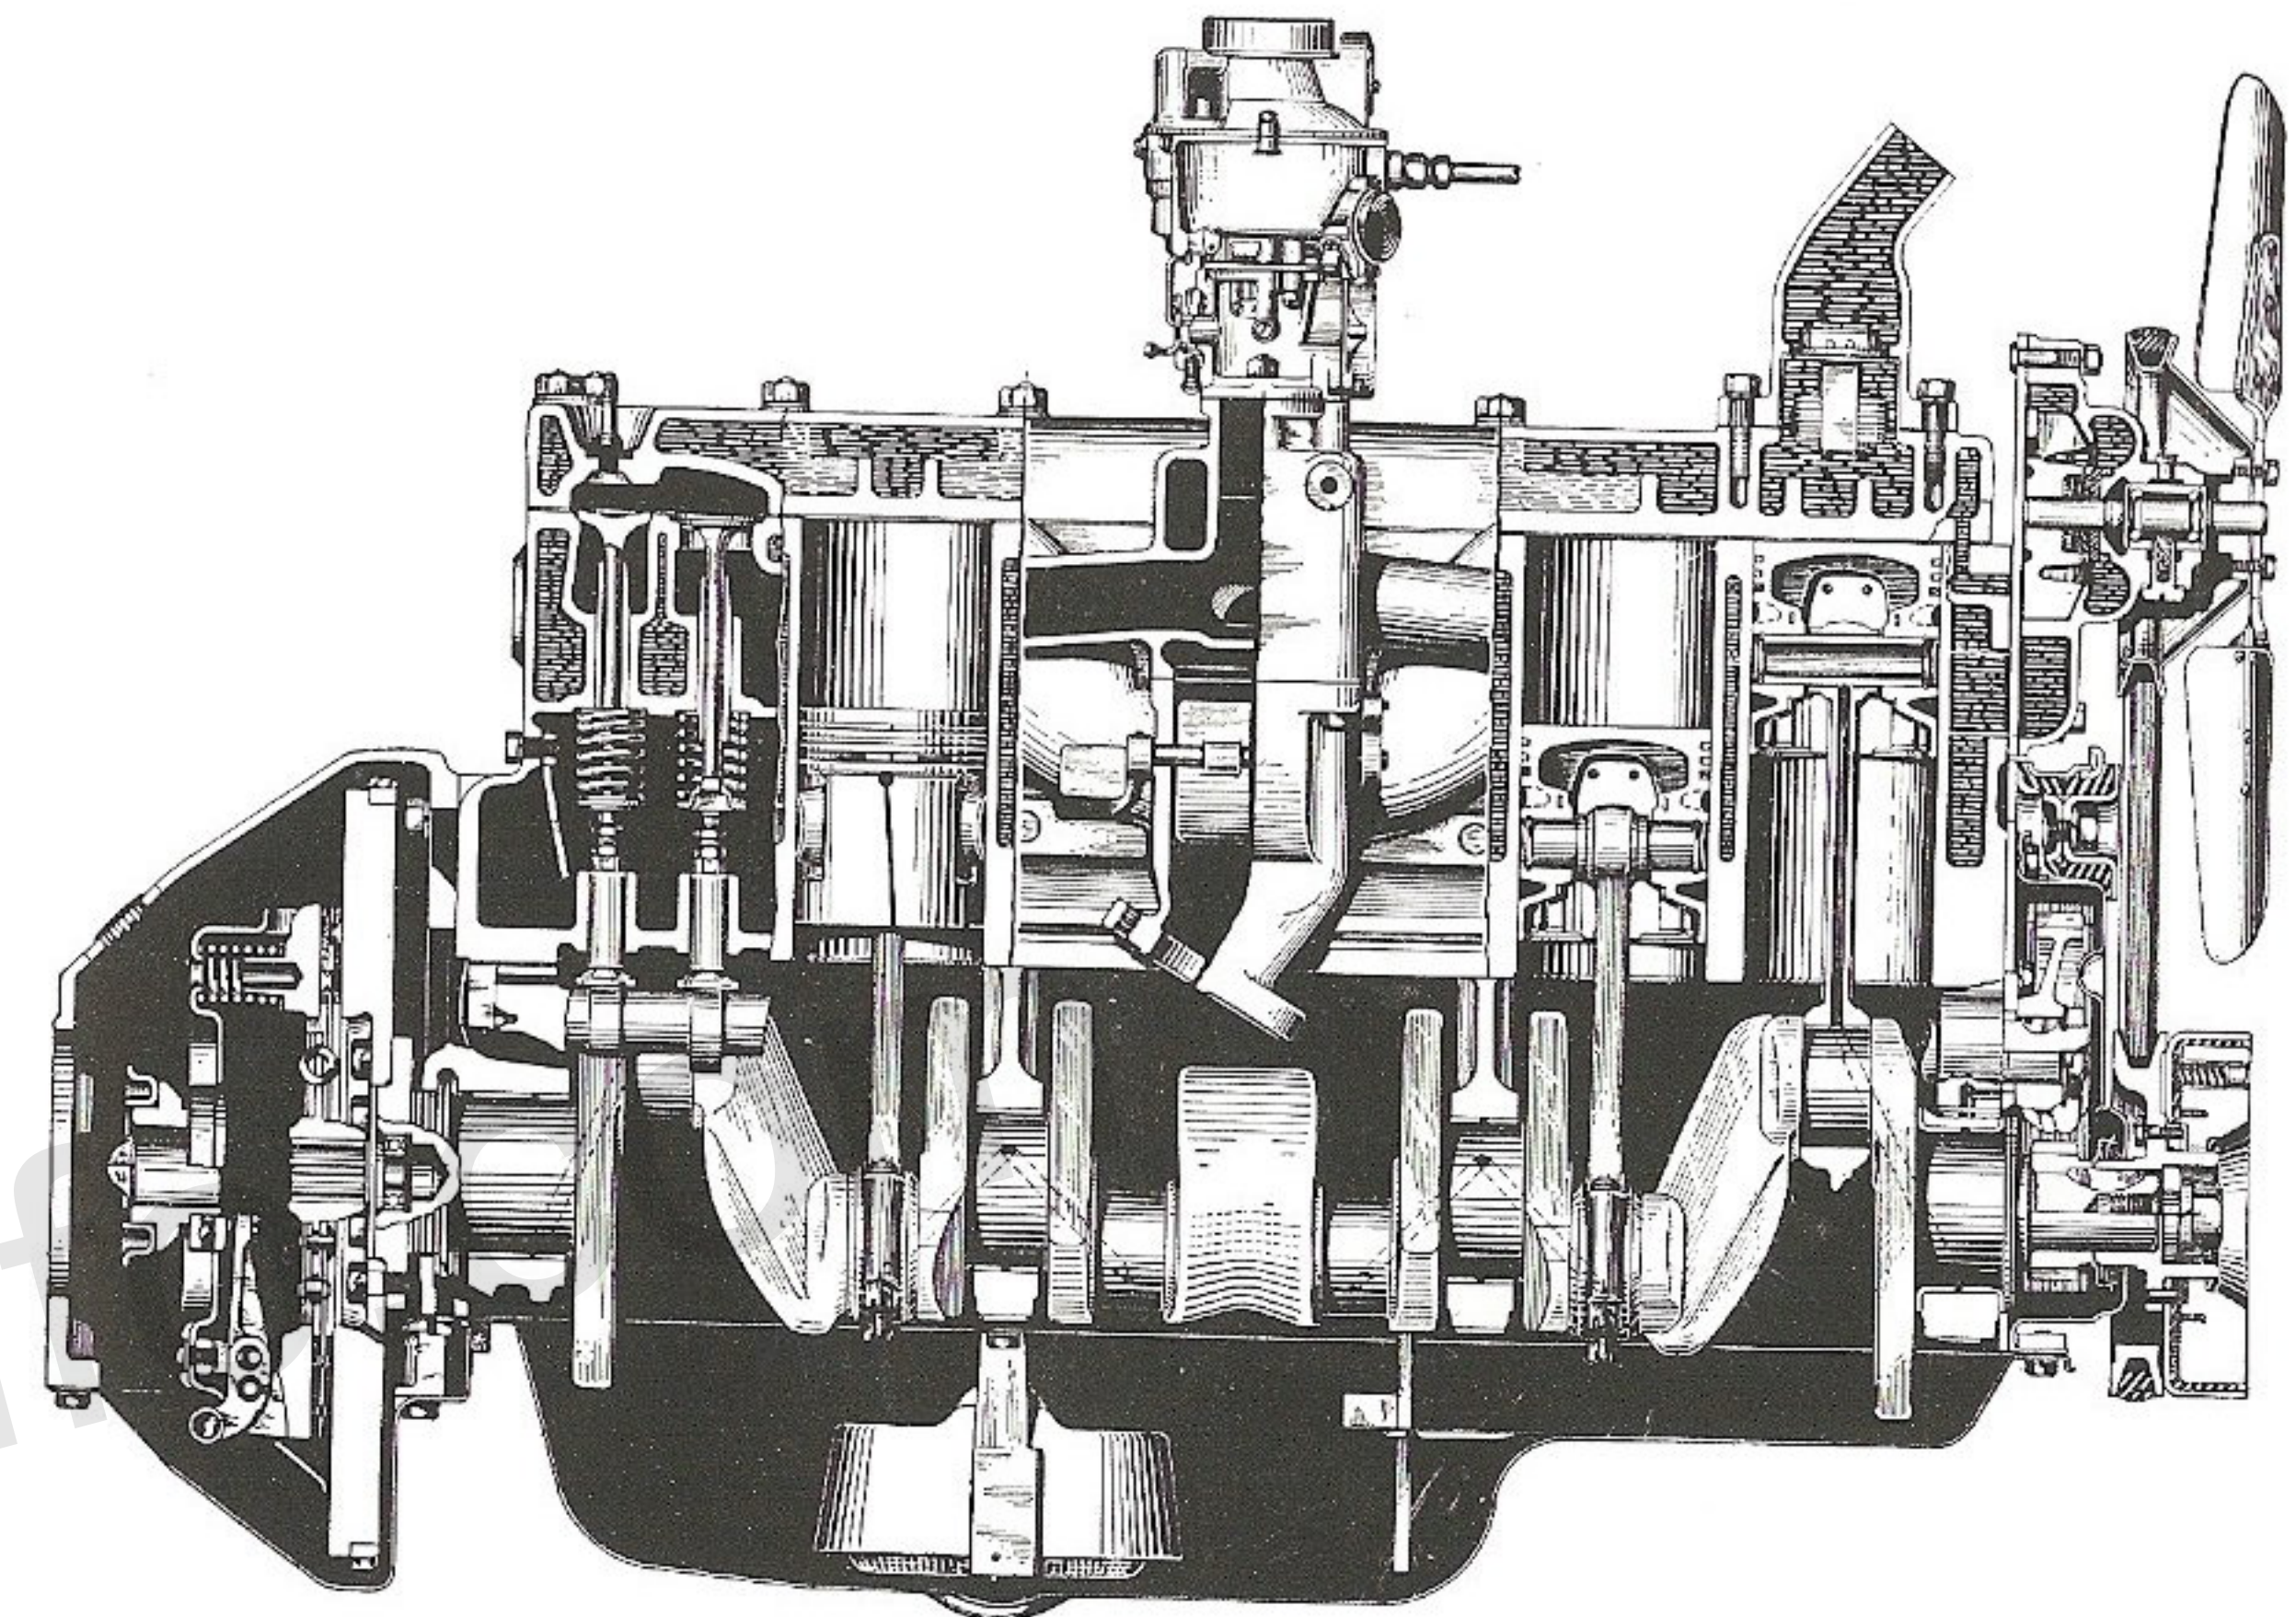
Side Section Packard Six Showing Clutch and Engine Details
